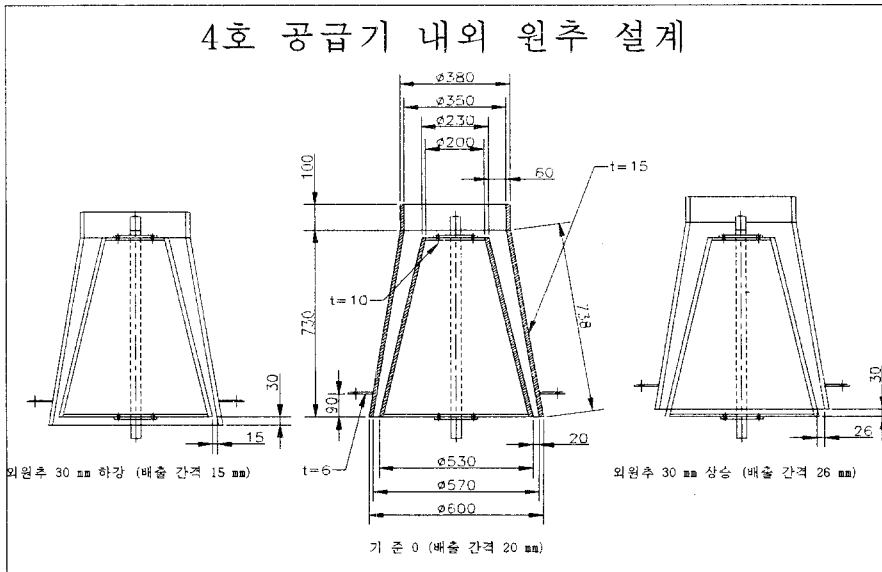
Design drawing of rotating cones for developed garlic separator
